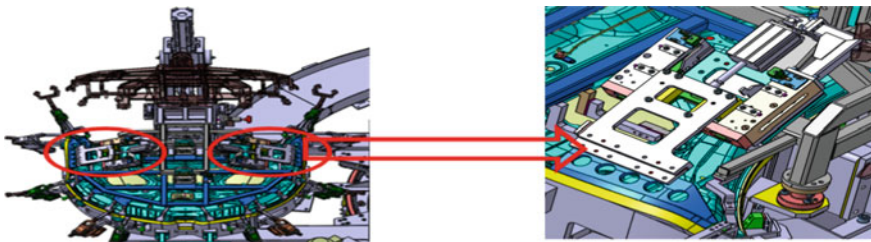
Application of the edge cutting mechanism on the hood rolling die
